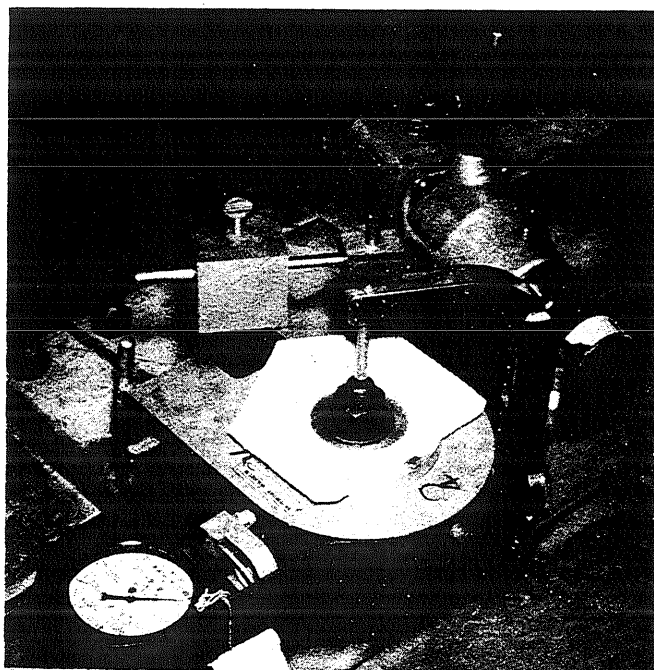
Torqued Tension Specimen in Skidmore-Wilhelm Calibrator
